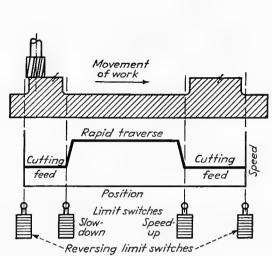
When milling work having a gap between machined surfaces, production is increased by rapid traverse between machining positions. Jump feed control is accomplished by means of adjustable limit switches, multispeed motors, and suitable magnetic controls.
